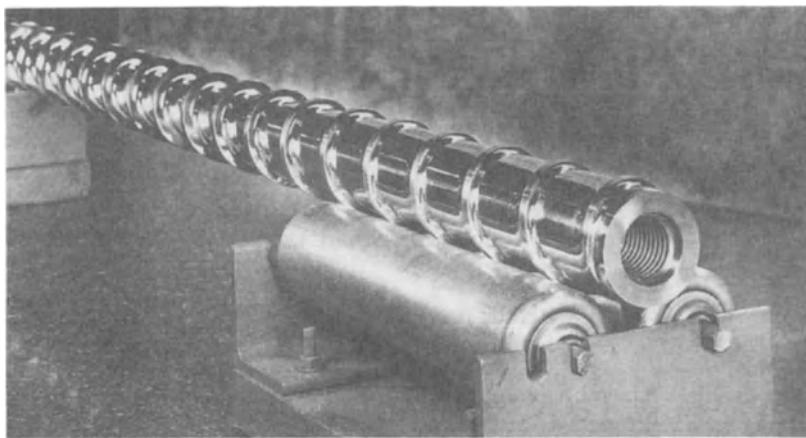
Inspection rollers make it easy to inspect screws.
